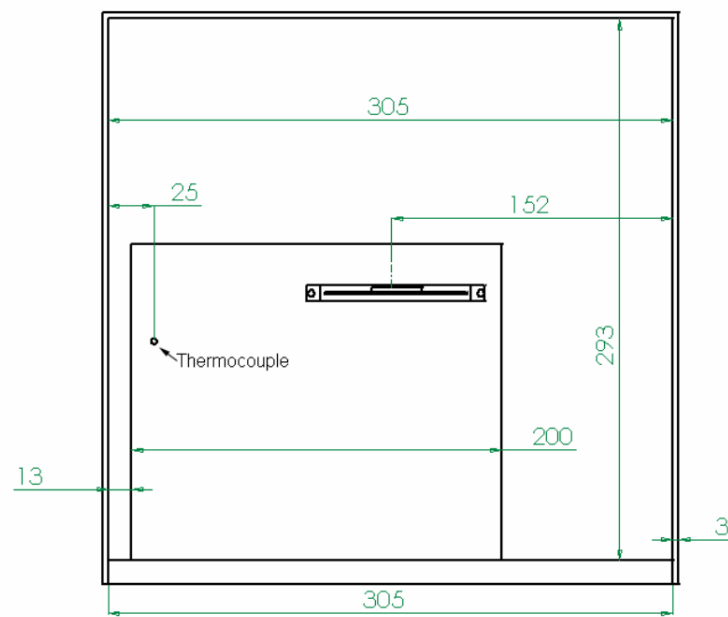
End view of the test fixture and enclosure (dimensions in mm) [10]
